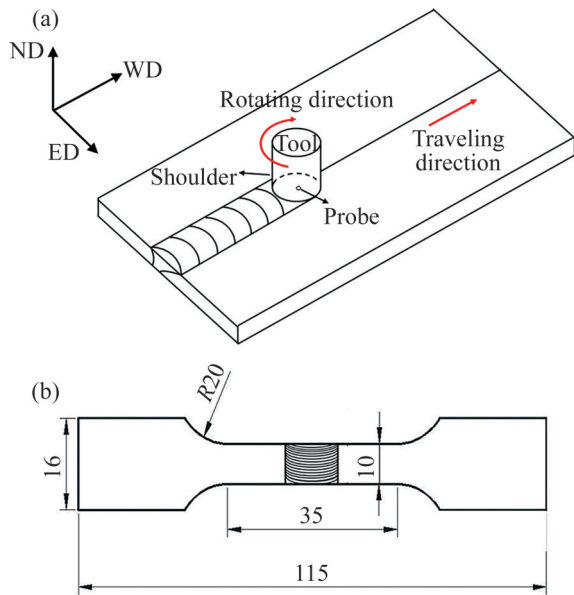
(a) Illustration of the friction stir welding process; (b) Geometry of the tensile sample with a weld (Unit: mm)
